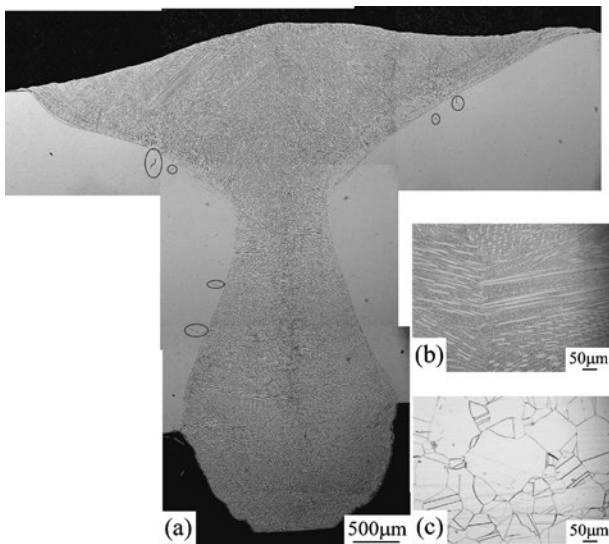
Microstructures of cross section of Hastelloy C-276 hybrid weld at laser power 6 kW, welding current 150 A and welding speed 2 m/min: (a) low magnification, (b) weld metal and (c) base metal.
